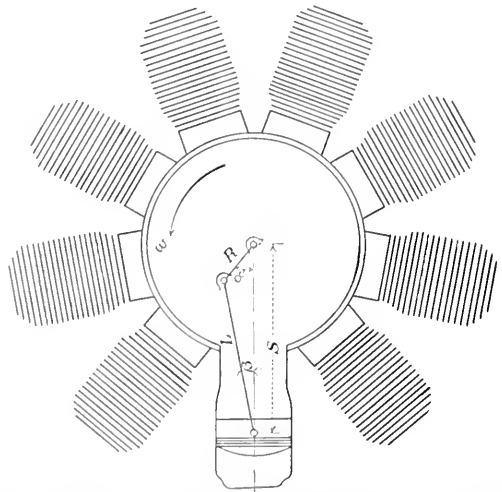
DIAGRAMMATIC VIEW OF ONE CONNECTING ROD OF LE RHÔNE 80-HP. MOTOR
